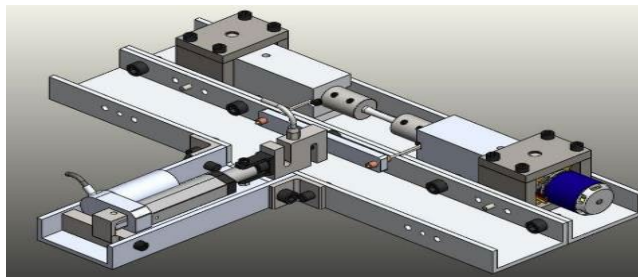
Variable amplitude fatigue testing machine for rotating shafts [15]
